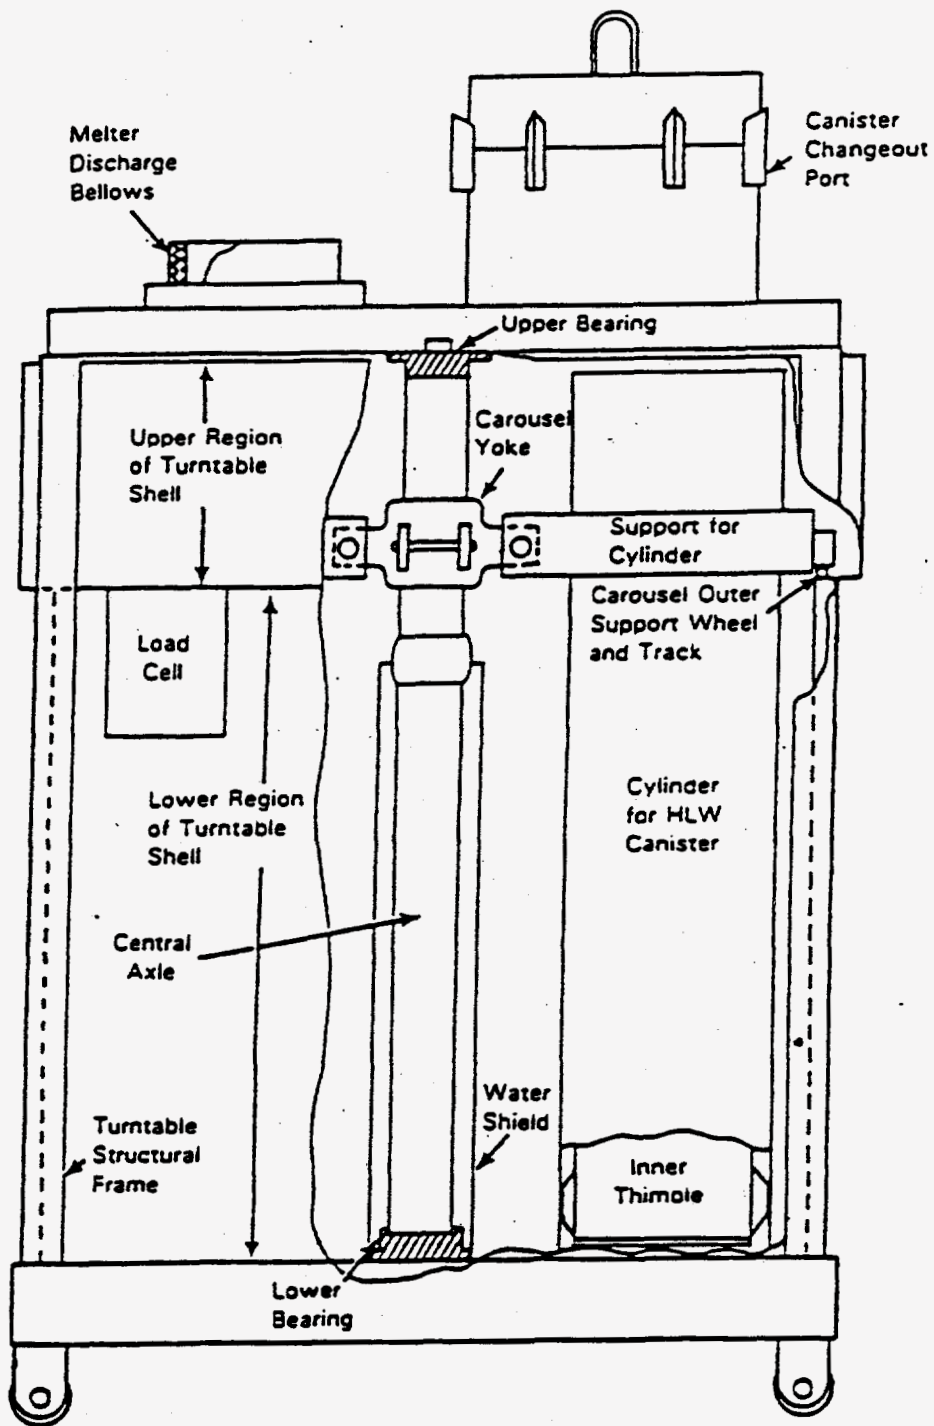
Glass Canister Turntable Assembly, View 1 (Whittington and Peters 1992)
